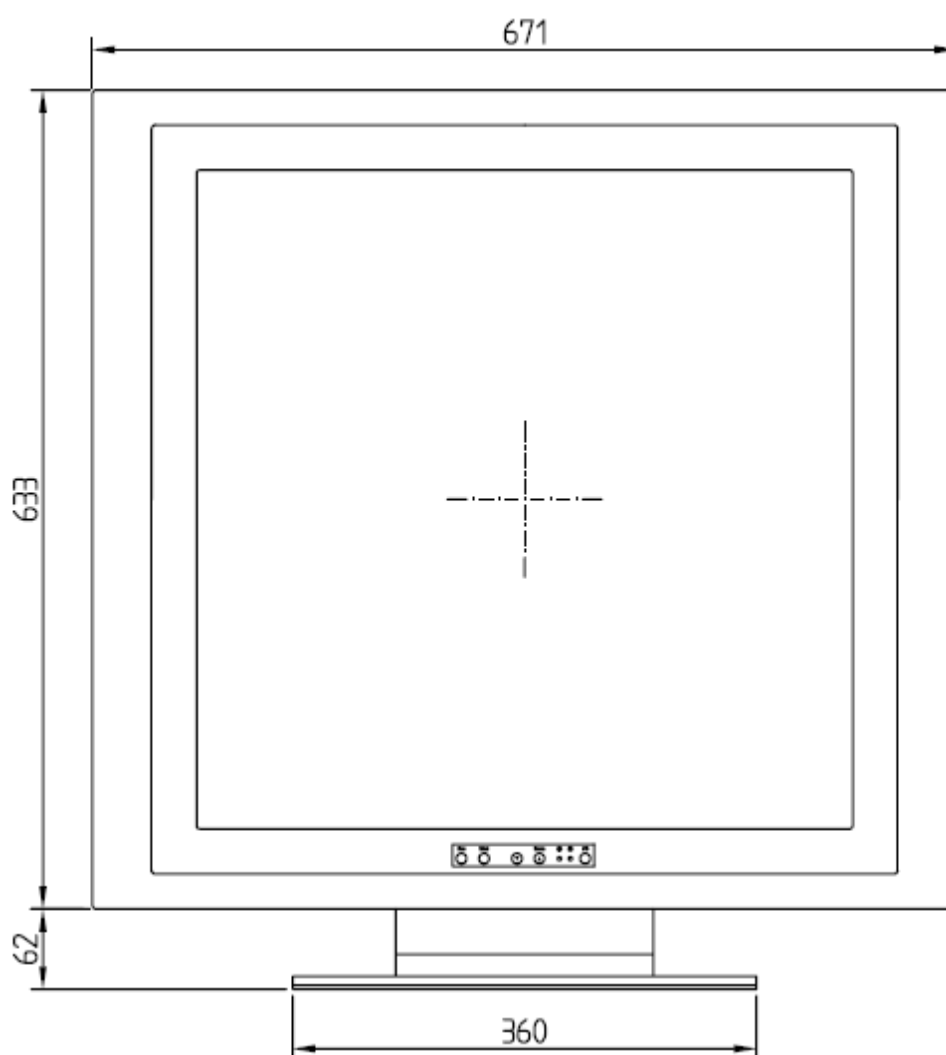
Raptor SQ2801 (Desktop Version); Front View
